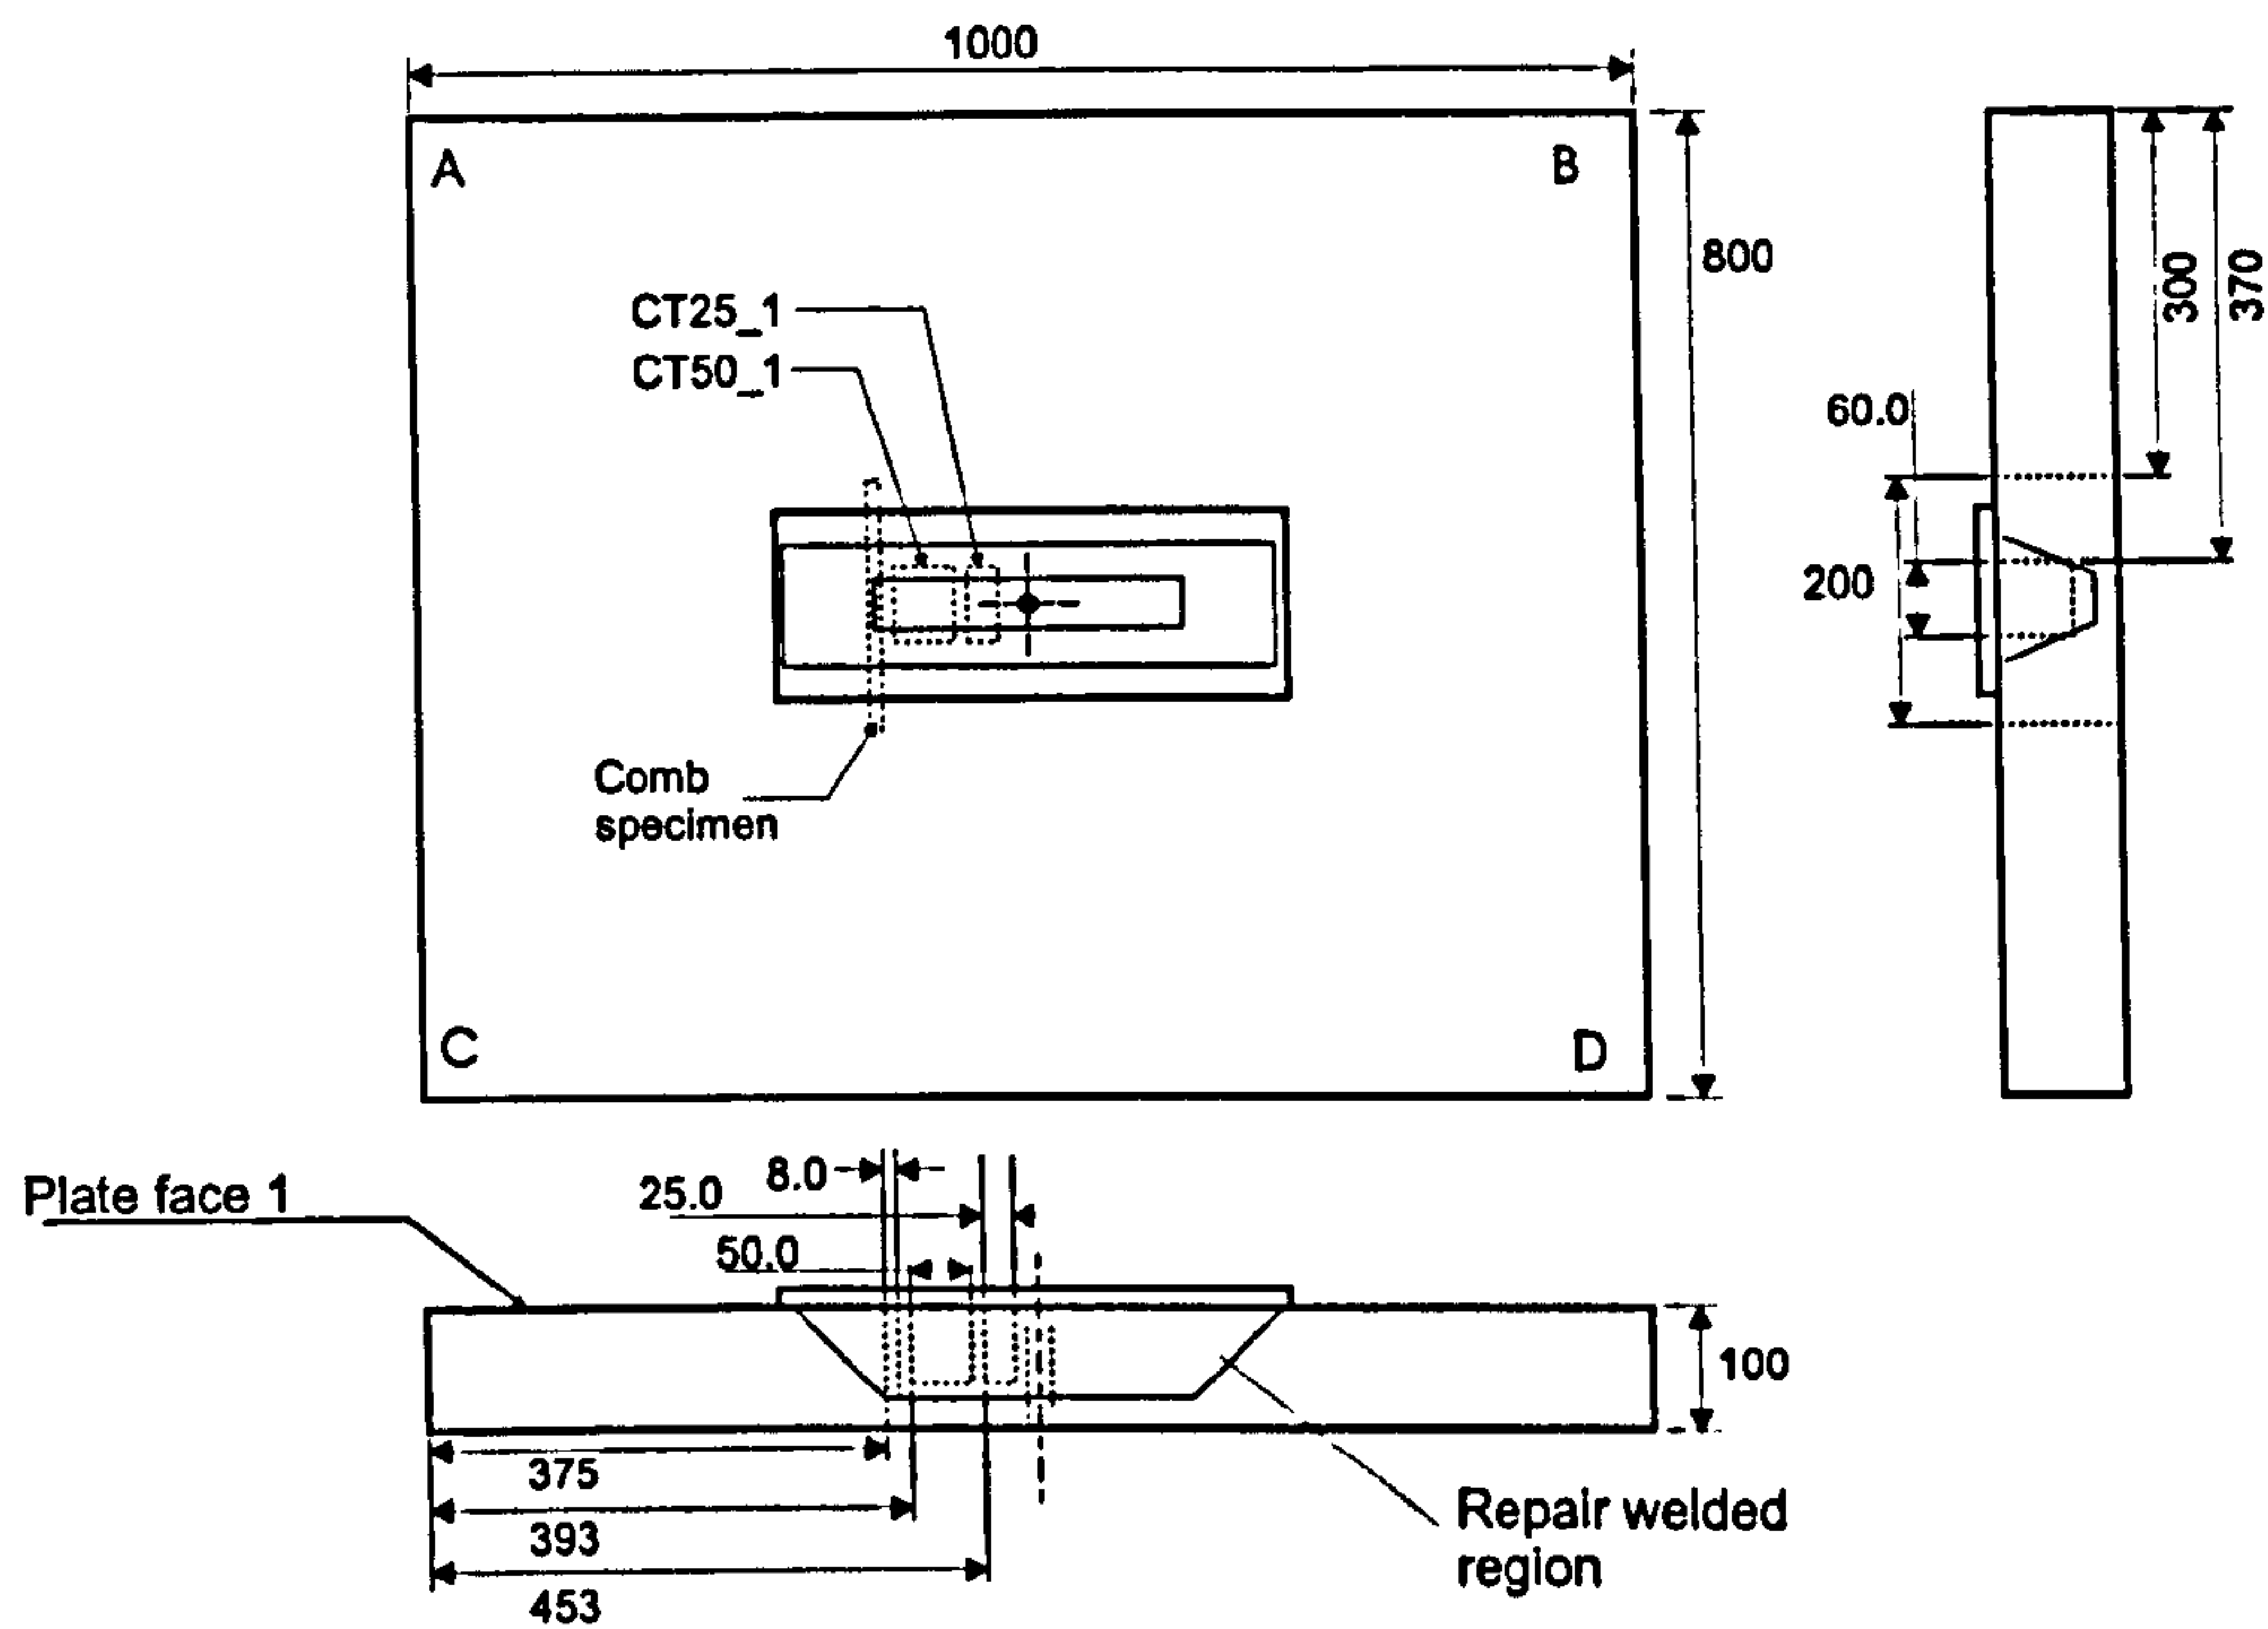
Geometry and extracted specimen locations for letterbox repair welded P275 ferritic steel plate. Dimensions in mm.
